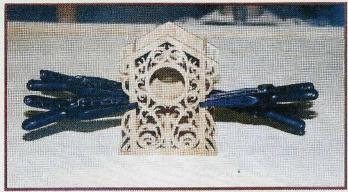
Glue the front (A) and the back (B) to the body assembly.
